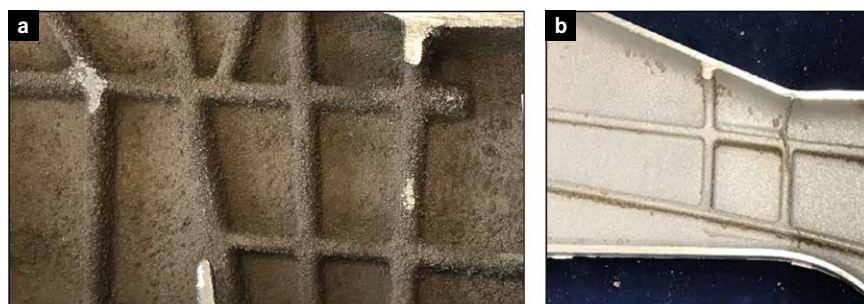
Inner casting surface after cross sectioning of the castings. Left: after removing a non-coated sand core; right: after removing a coated sand core.
